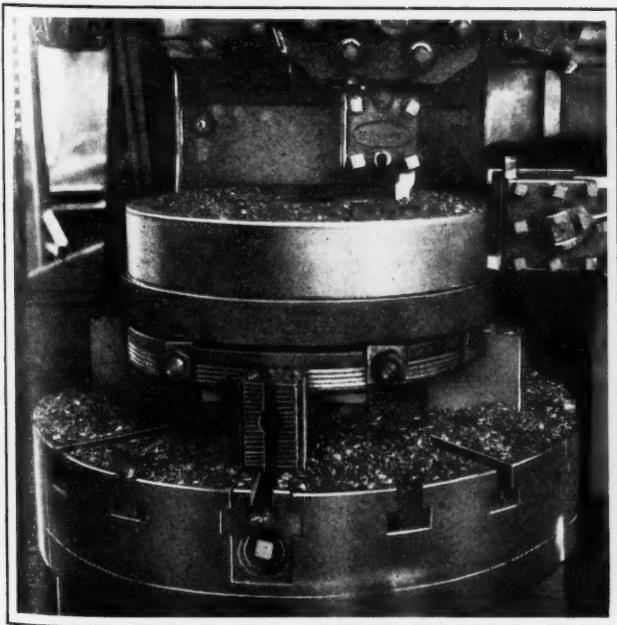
Piston-head Chuck which Holds Piston-head by Gripping Three Studs Screwed into Lower Side
